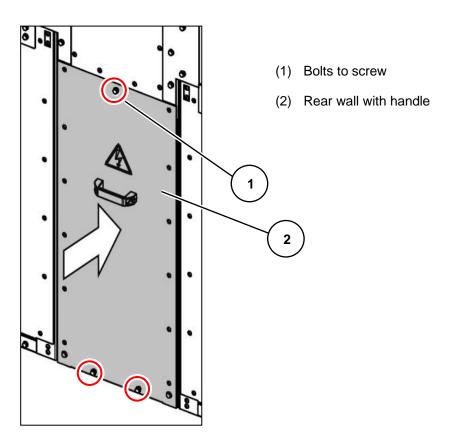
Contactor panels with panel width 435 mm only: Installing and fixing the rear wall
